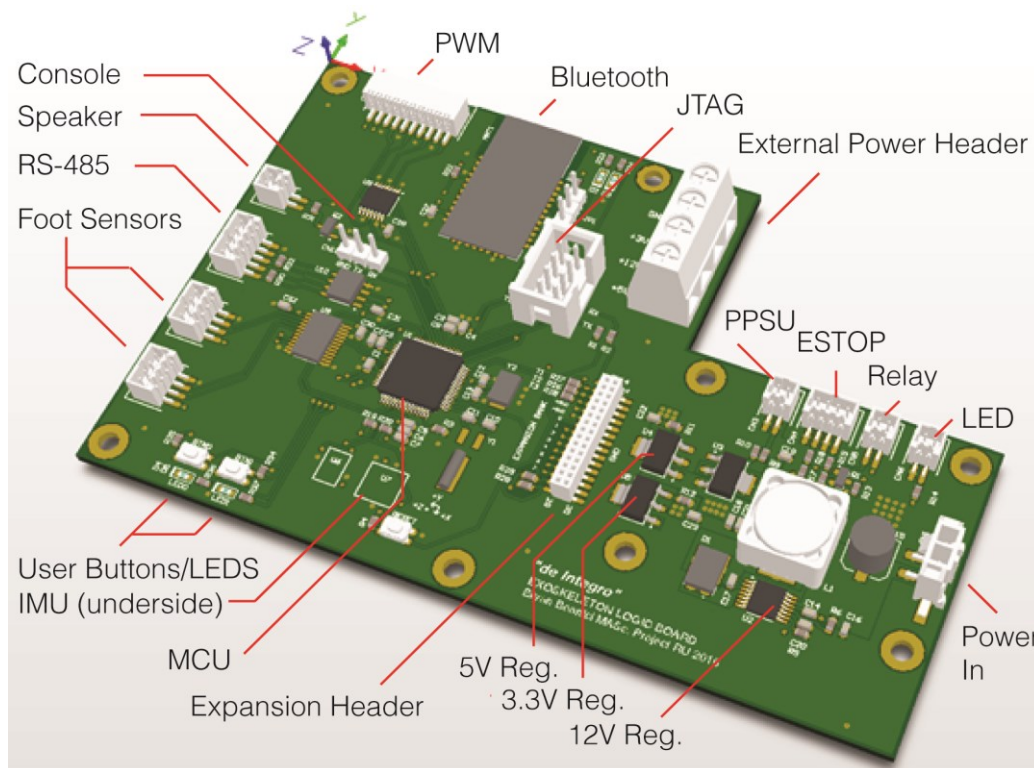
3D Isometric view of Integrated Design showing components and system interfaces
